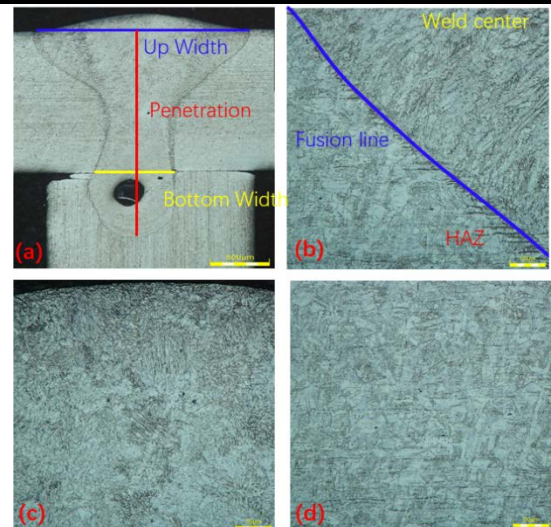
The macro-morphology of characteristic dimensions (a), fusion zone (b), center weld (c) and base metal (d)
